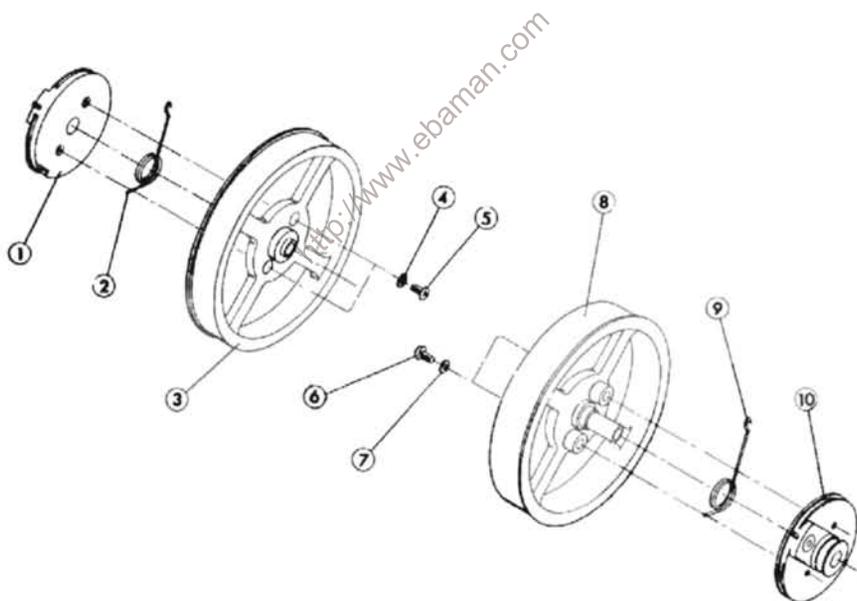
Exploded View of Main and Vernier Capacitor Dial Ass'y
